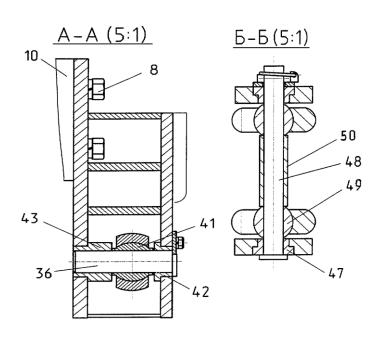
The design of the coupling device for connecting wheel tractor -trailer .
